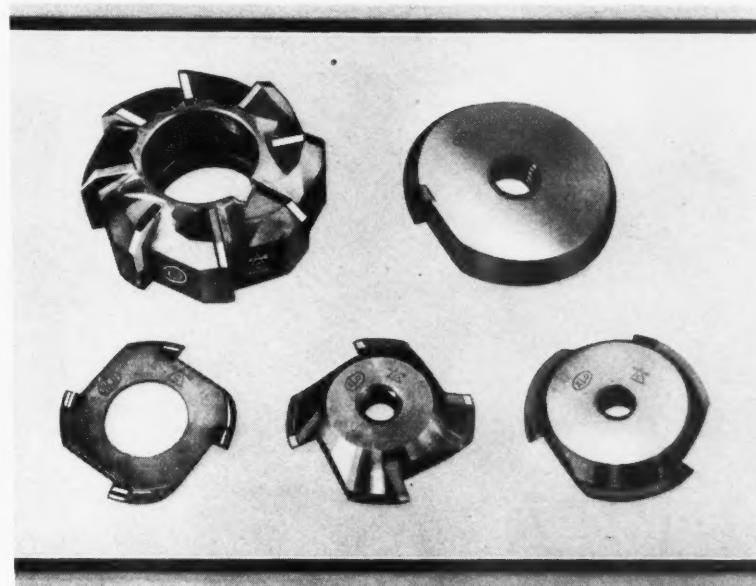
Counterbore, Circular Forming Tool, and Combination Forming and Cutting-off Tools. All of which Have Carboloy Tips
